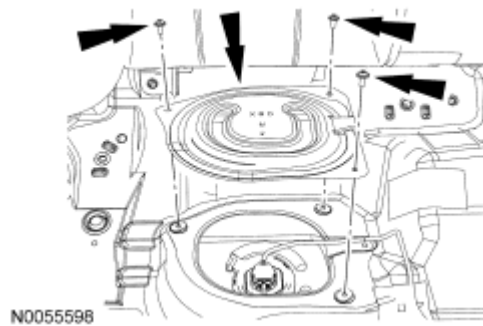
Identifying Fuel Level Sensor Access Cover & Screws
